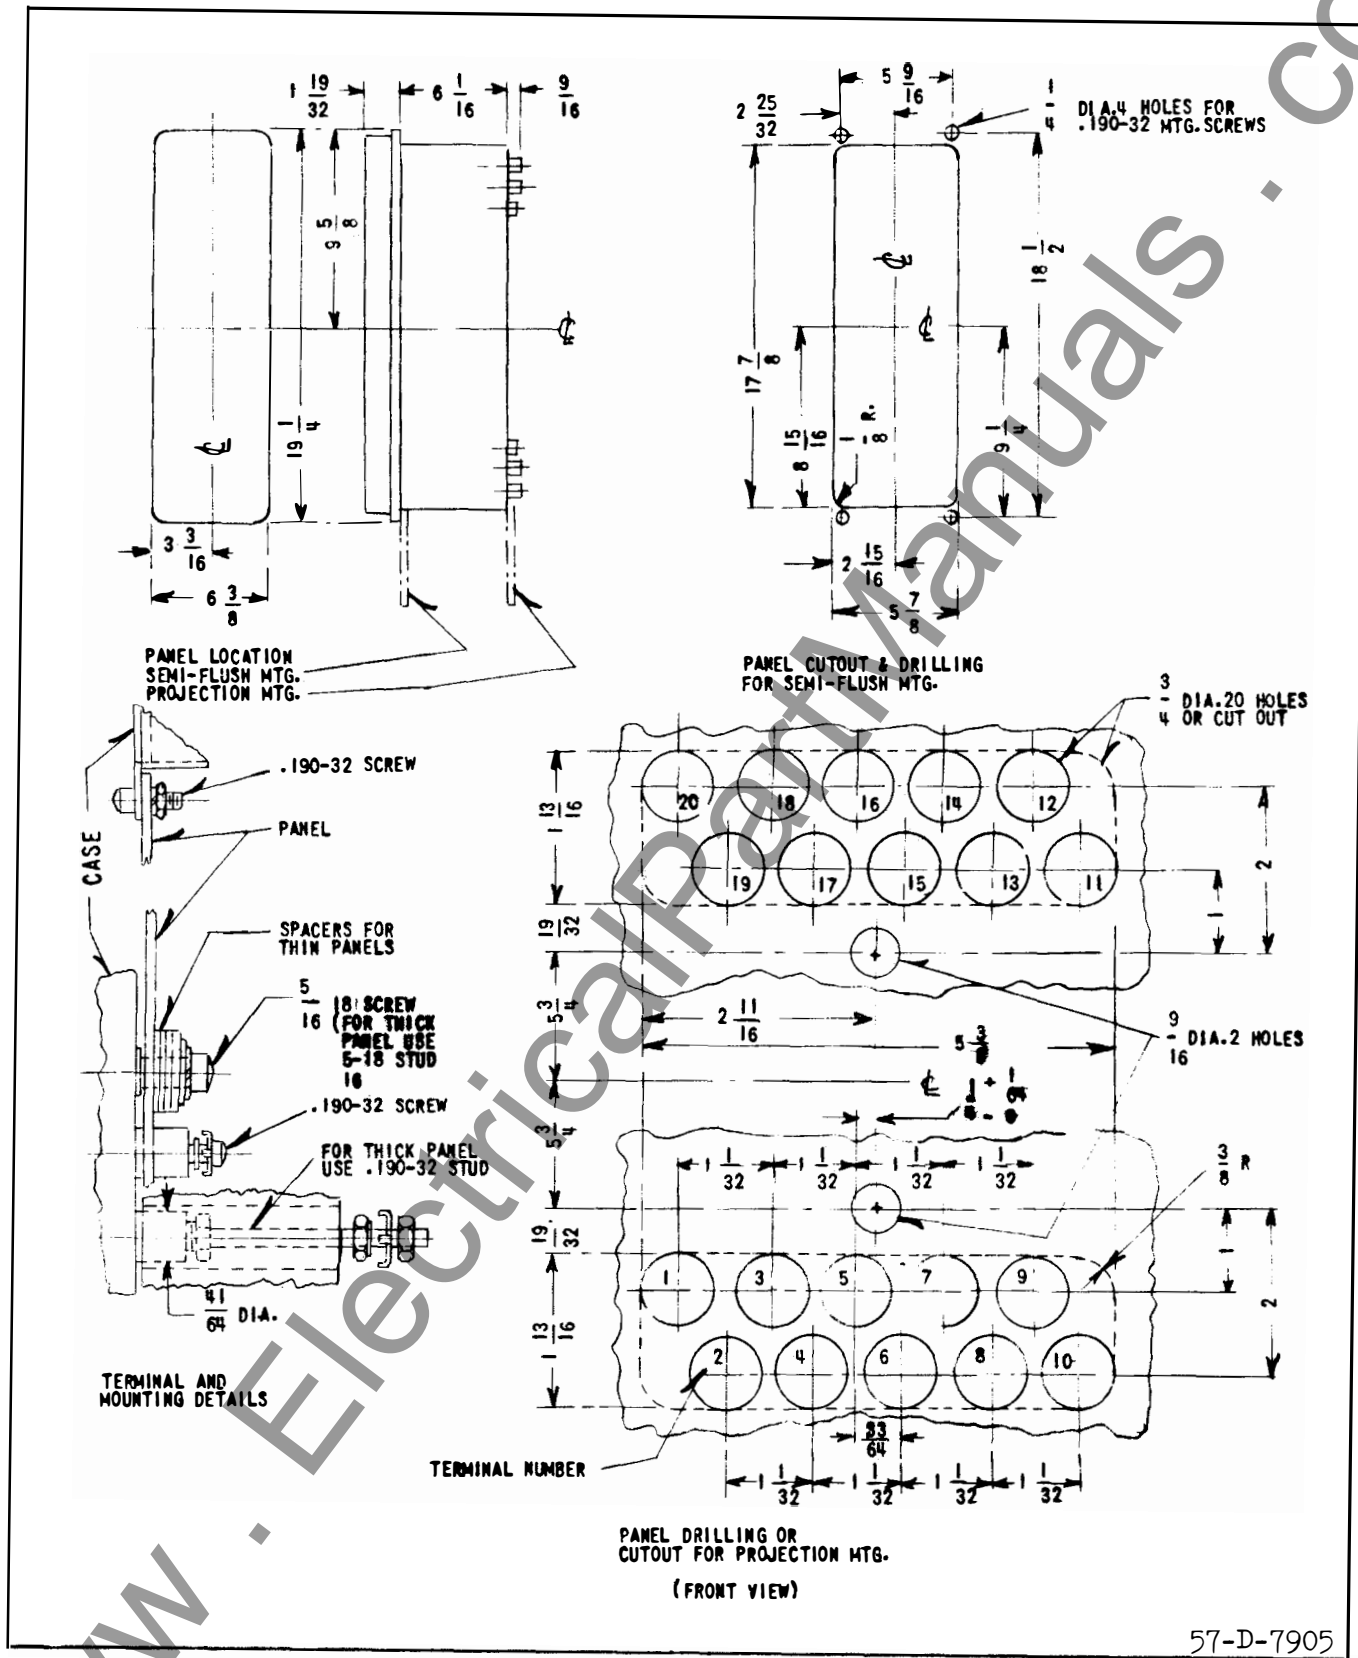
Outline and Drilling Plan of the Type W-2 Test Switch.
